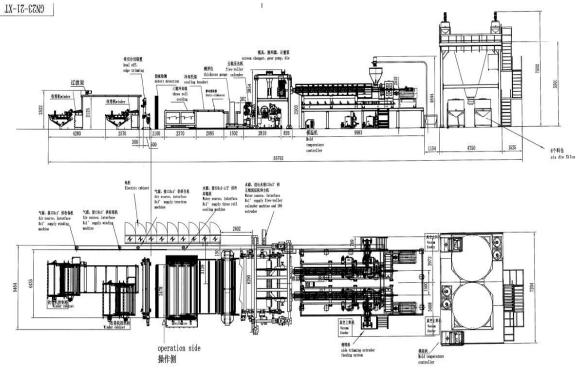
First Floor & Layout plan for EVA Encapsulant Manufacturing setup
